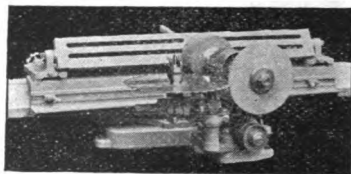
AUTOMATIC BENCH KNIFE GRINDER WITH SAW GUMMER AND SHARPENER.
